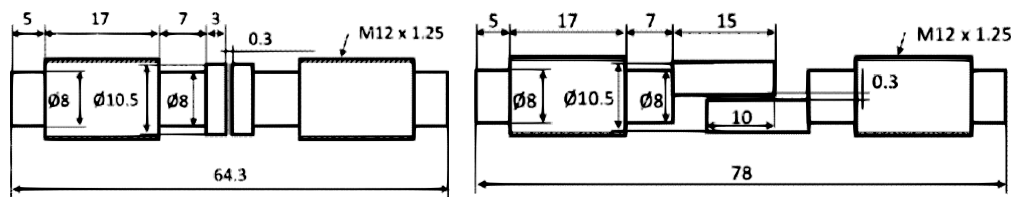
Butt joint and lap shear specimen geometry [93]
